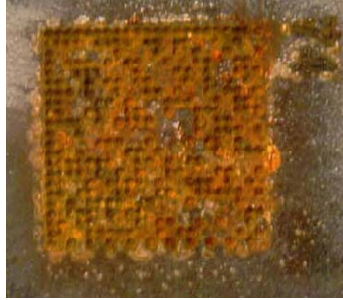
Deep Laser Engraving after Hot, Cold and Icing
